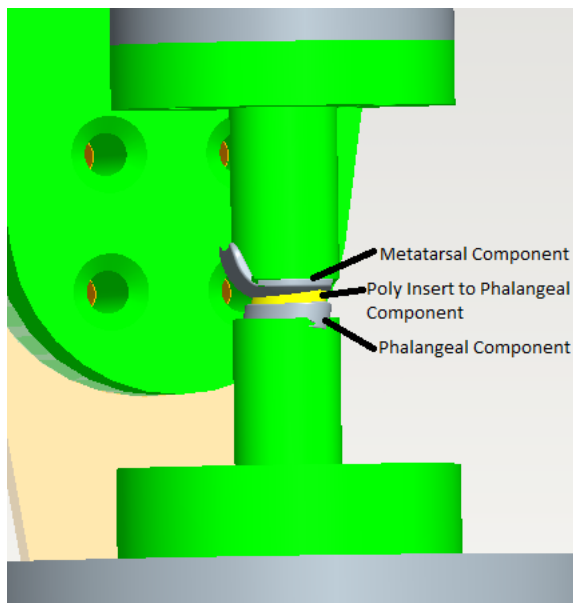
Solid Model: Close-Up View of Implant Mounted in the Wear Tester
